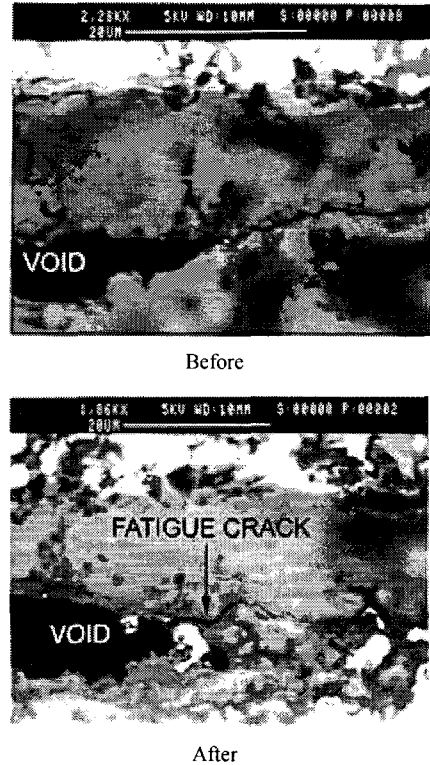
Piezo-induced Fatigue of a Solder Joint.
